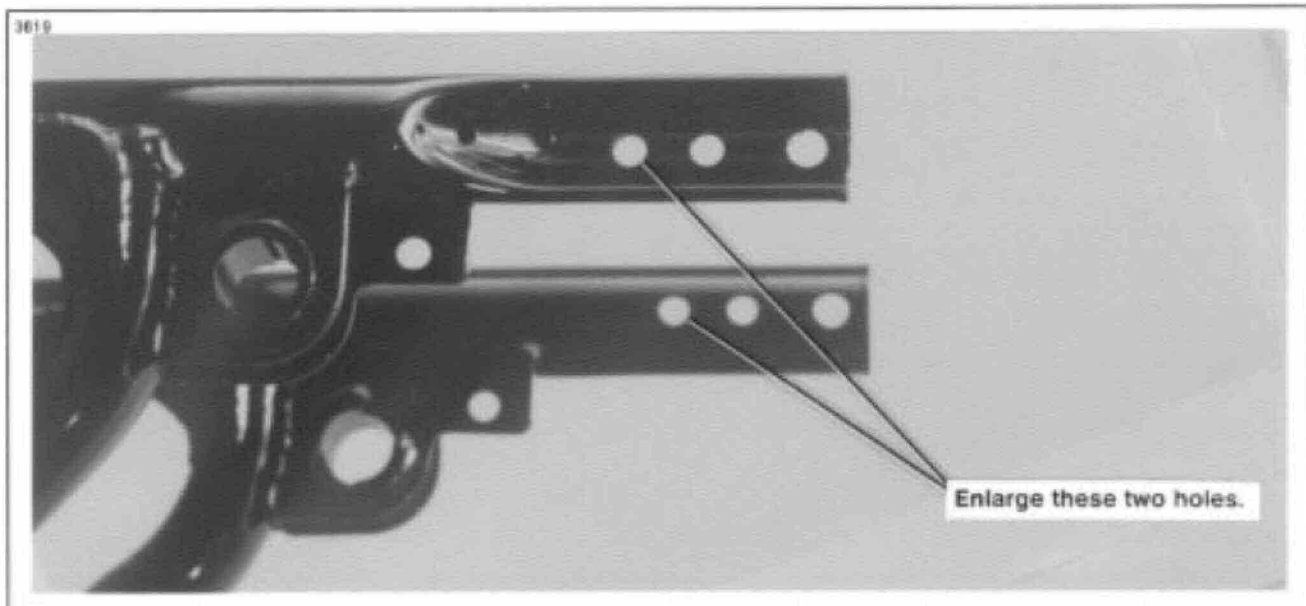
Frame Hole Enlargement (Right and Left Rear Turn Signal Assembly Mounting Bolt Holes)
